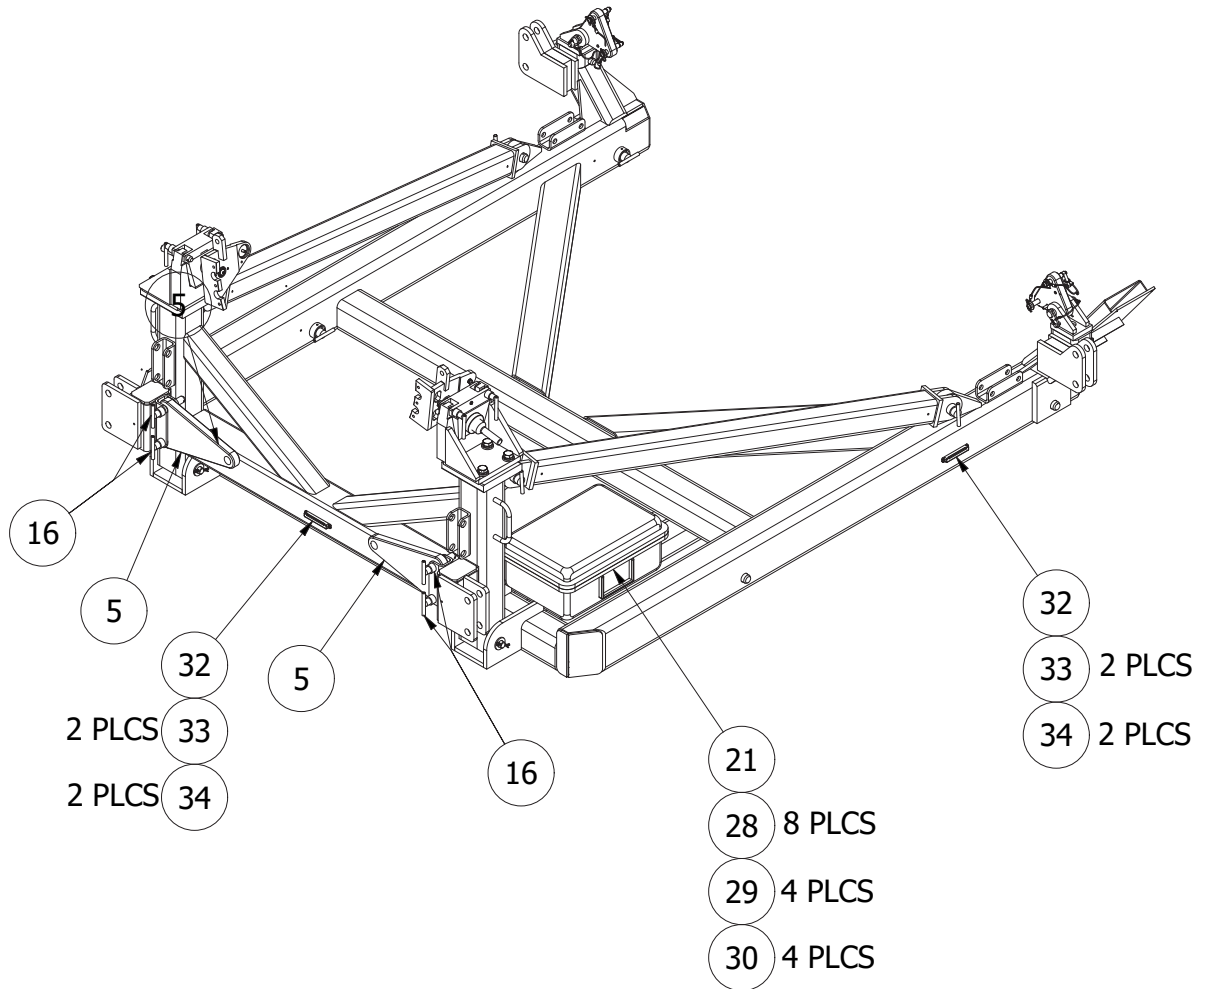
AGSE-E24002-S01 Cradle Assembly
